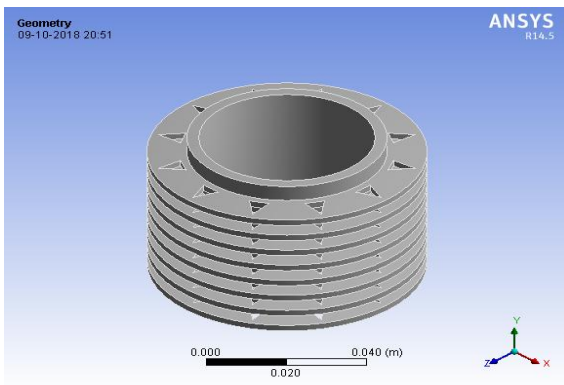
Geometry Of Cylindrical Block Having Circular Fins With Triangular Holes.
